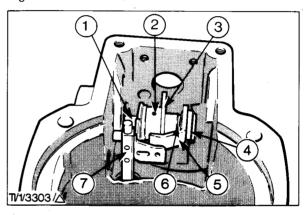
The Excess Fuel and Stop Control Shaft (Dover)
